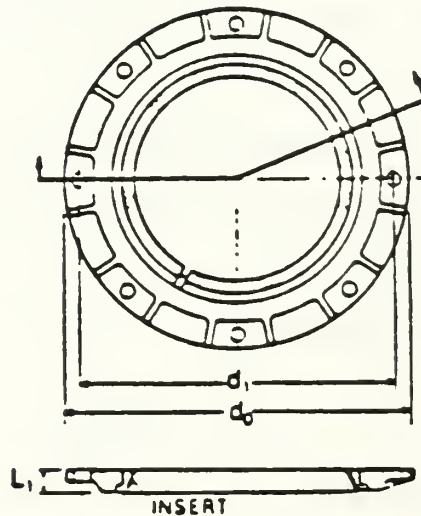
shows a schematic of a boiling tube. These were accurately held in place using Teflon inserts and sealed by O-rings. A 4-stud strong-back secured the Teflon inserts inside the aluminum flanges.
